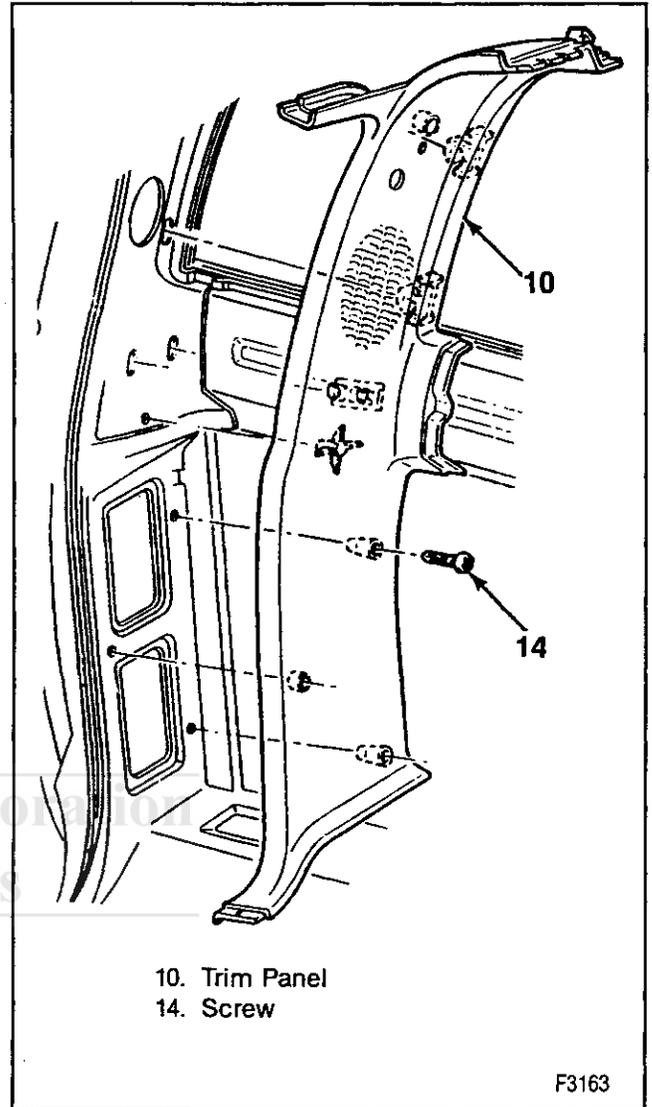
Body Side Trim Panel (Regular and Crew Cab)
